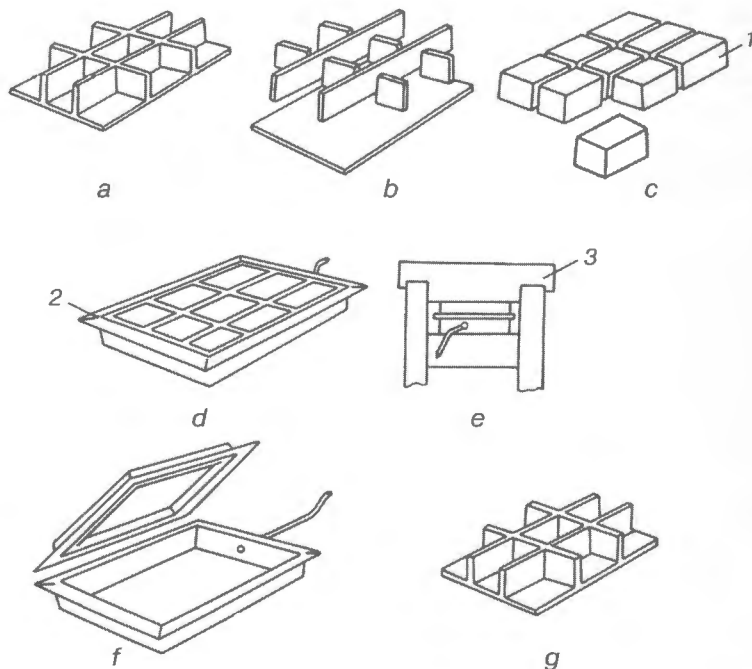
Process sequence of diffusion bonding with highly intensive force action: *a* – required structure; *b* – blanks for welding; *c* – technological elements-inserts; *d* – assembly; *e* – welding process; *f* – dismantling; *g* – finished structure; *1* – technological inserts; *2* – process container; *3* – press
